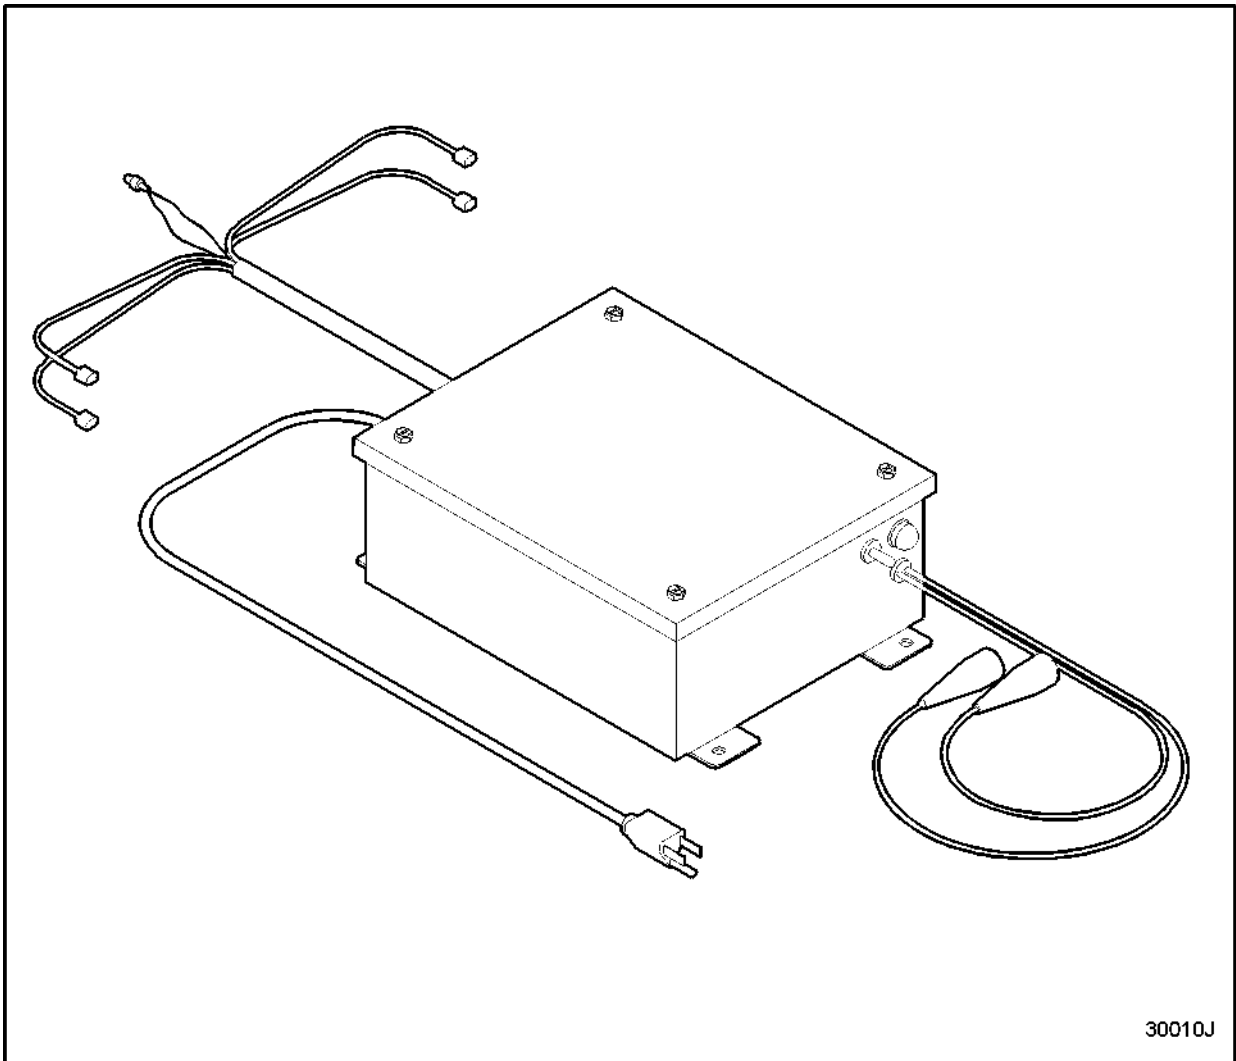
Injector Pop Fixture Power Supply,J 34760-300
